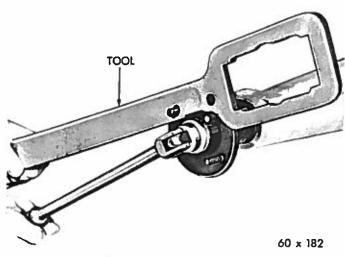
Removing or Installing Output Shaft Flange Nut (Tool C-3281)
